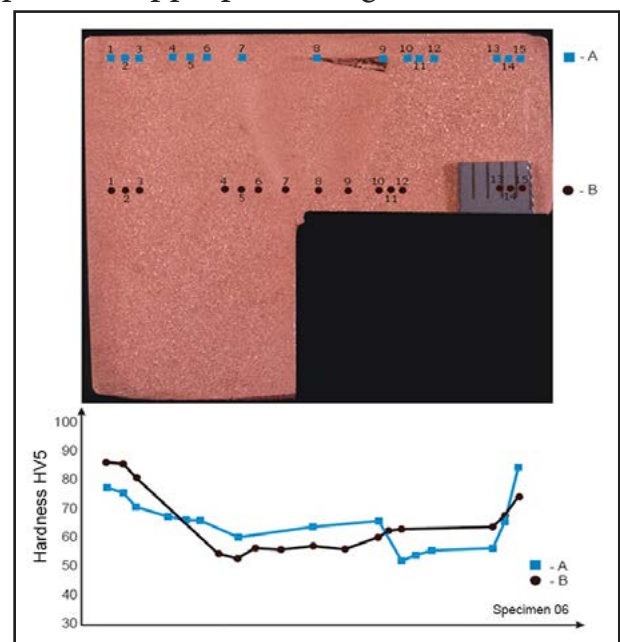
Weld structure and hardness measurements on the FSW joint cross-sections. Welding parameters:
